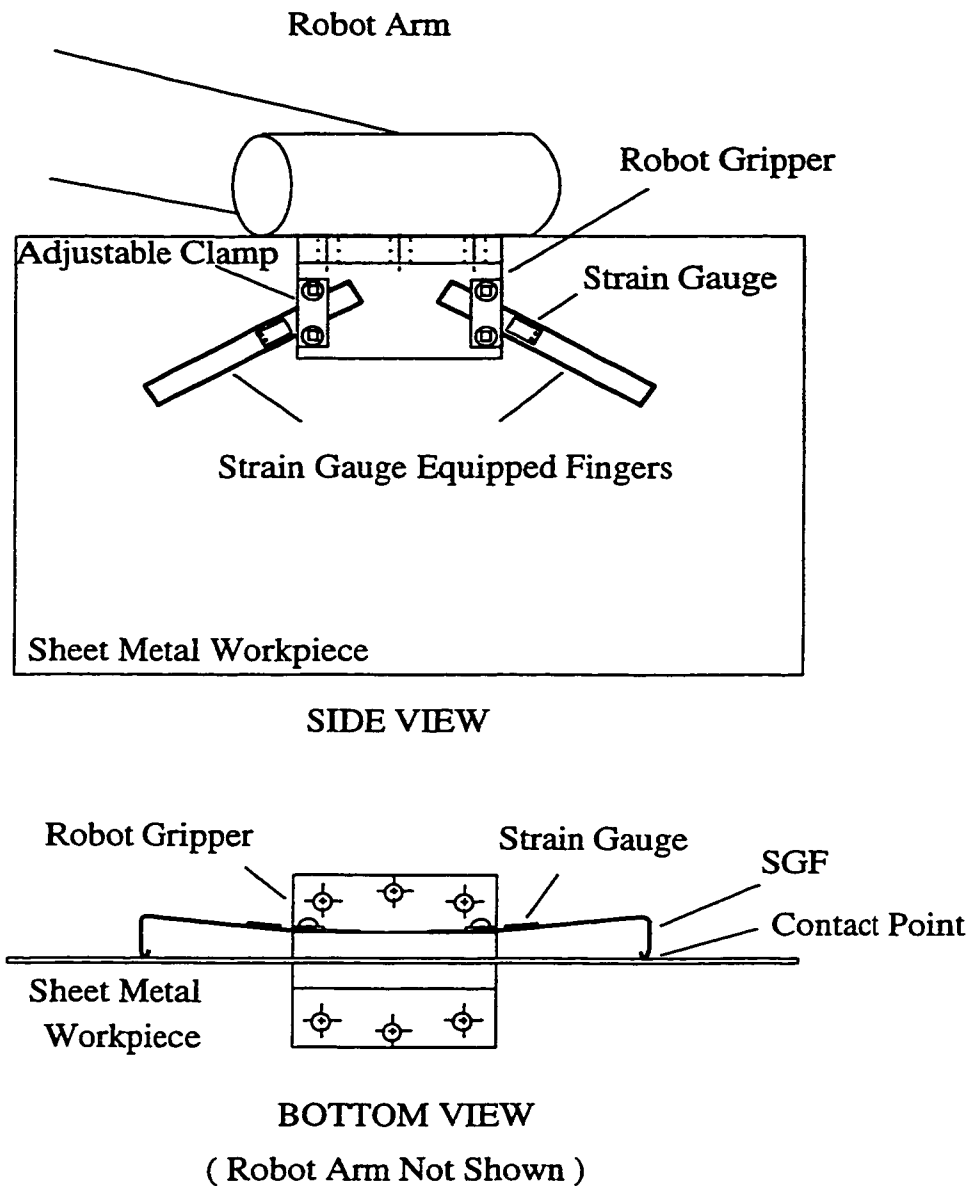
Design of the Strain Gauge-equipped Fingers (SGFs)
